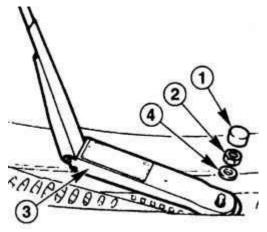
Components wiper arm: 1 - cap 2 - fastening nut, 3 - lever 4 - Puck
